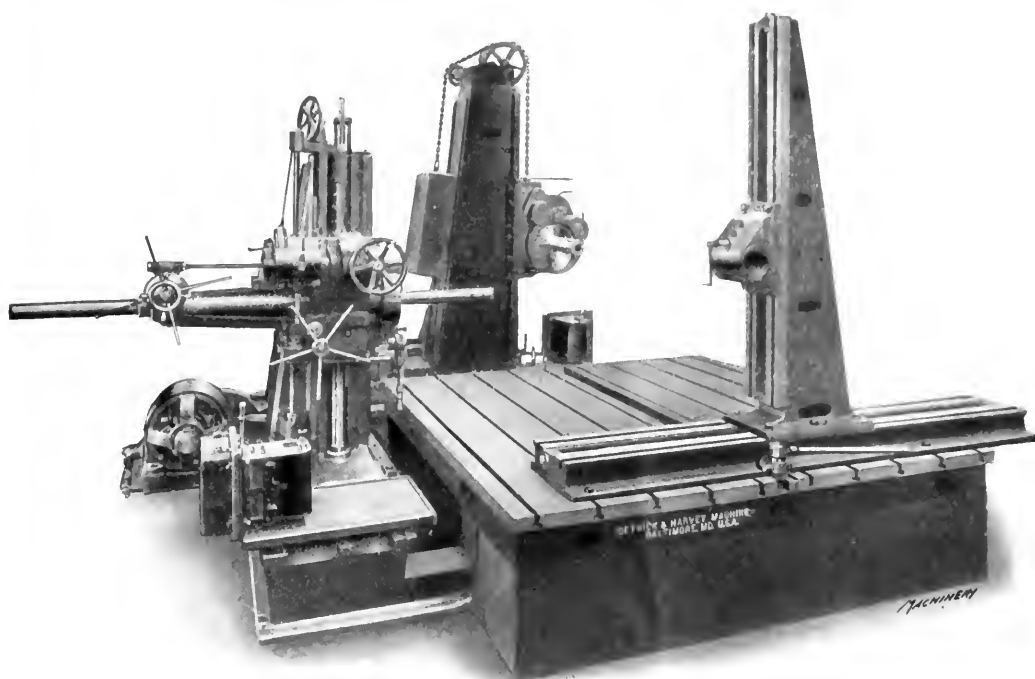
Front View of Detrick & Harvey Duplex Floor Boring Machine
